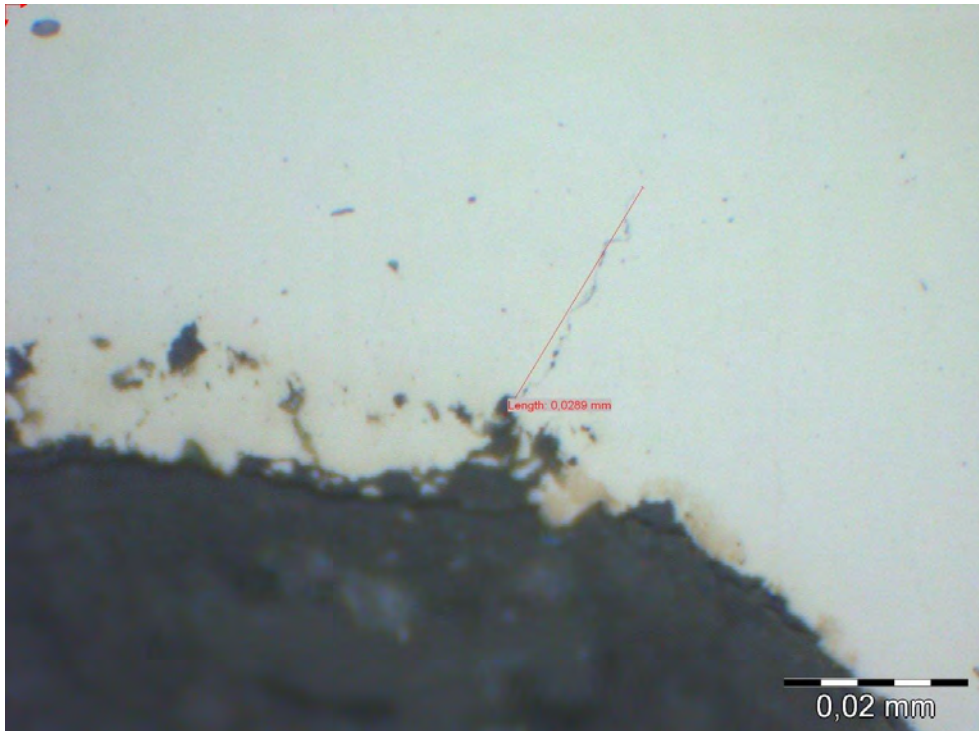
Crack at segment A, second ridge on barrel no. 8832/6713
